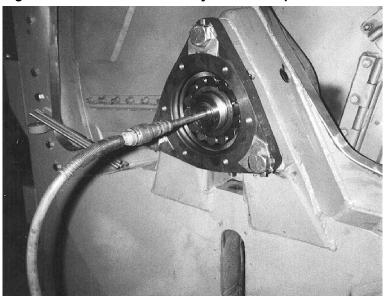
Connection From Hydraulic Pump to Assist in Bearing Removal
